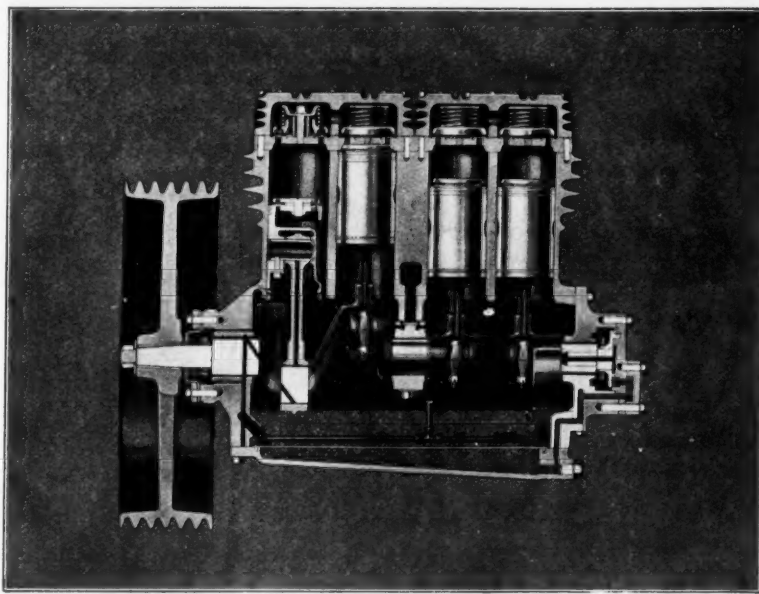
Cutaway view of the Frigidaire 4-cylinder compressor for heavy duty applications. Lubrication is entirely automatic.
